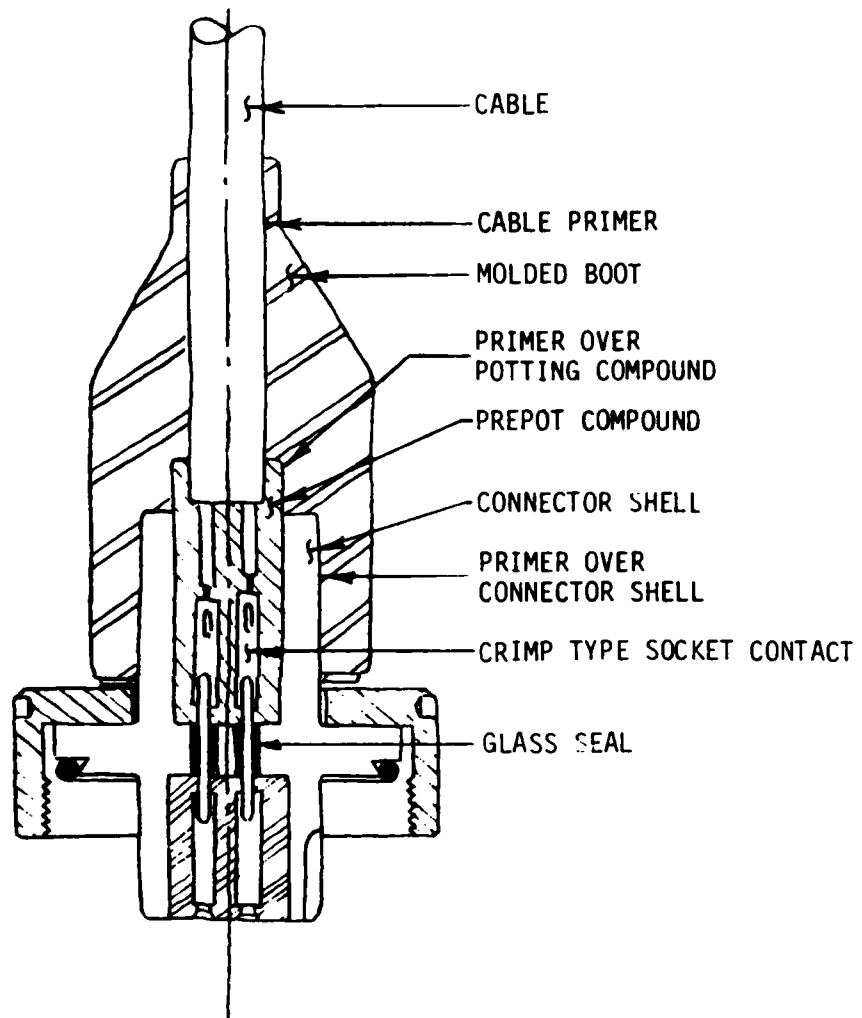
TYPICAL MOLDED PLUG ASSEMBLY
